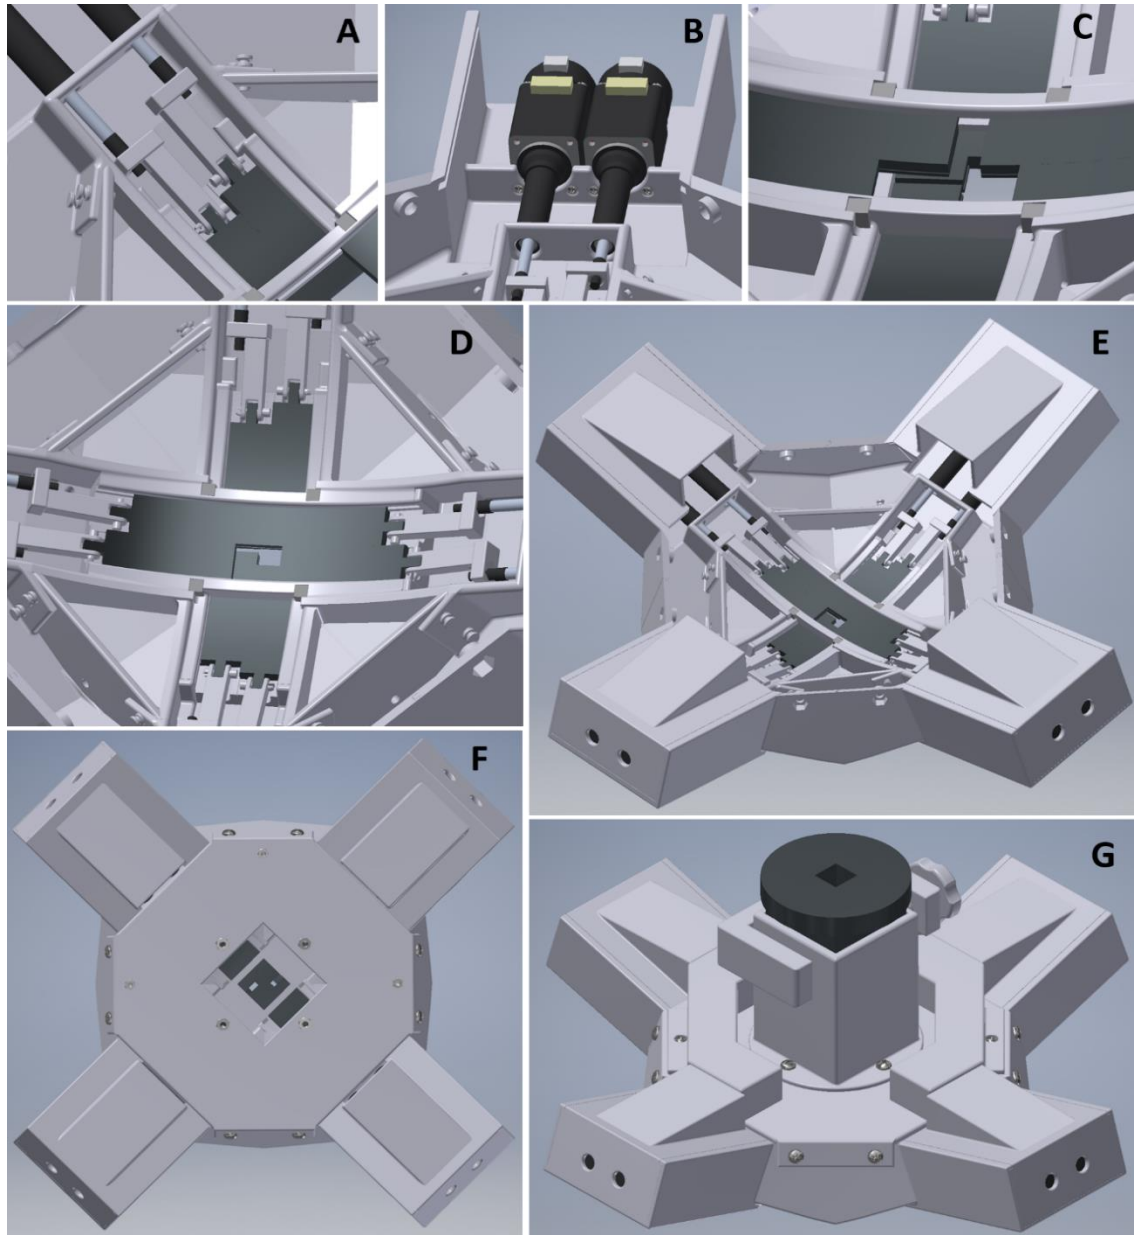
CAD model of the SOC. (A) Leaves connected to motor shafts with 3D printed rods and pins. (B) Stepper motor pair screwed into housing. (C) Outer leaf tongues slide along rails in housing. Shown in each corner of the SOC field are tungsten inserts for shielding the corners of the larger 4 x 4 cm primary collimator field. (D) All four orthogonal leaf banks. (E) Covers slide into the housing over each motor bank. (F) Main housing top attached, with mount for square primary collimator. (G) Complete SOC system with adapter to the primary 4x4 cm square SmART collimator. The collimator slides tightly into the adapter with a screw clamp for added support. The C-shaped attachment around the adapter guides the motor cables to the main socket on the back of the SOC.
